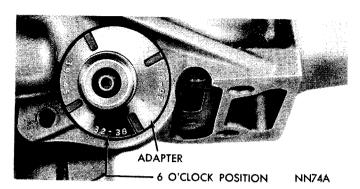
Speedometer Pinion and Adapter-Installed (Retainer Removed for View)
